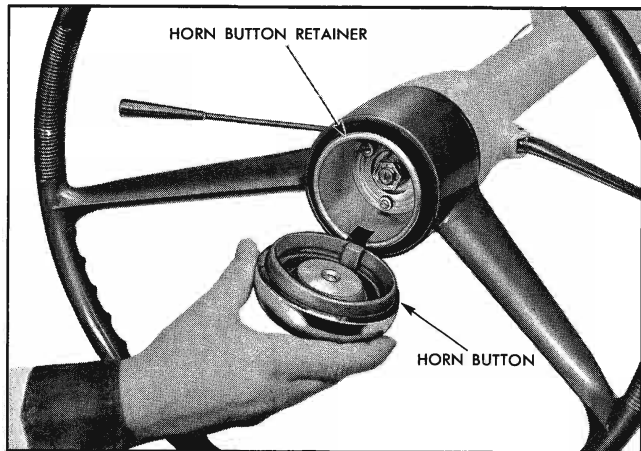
Removing Standard Steering Wheel Horn Button
